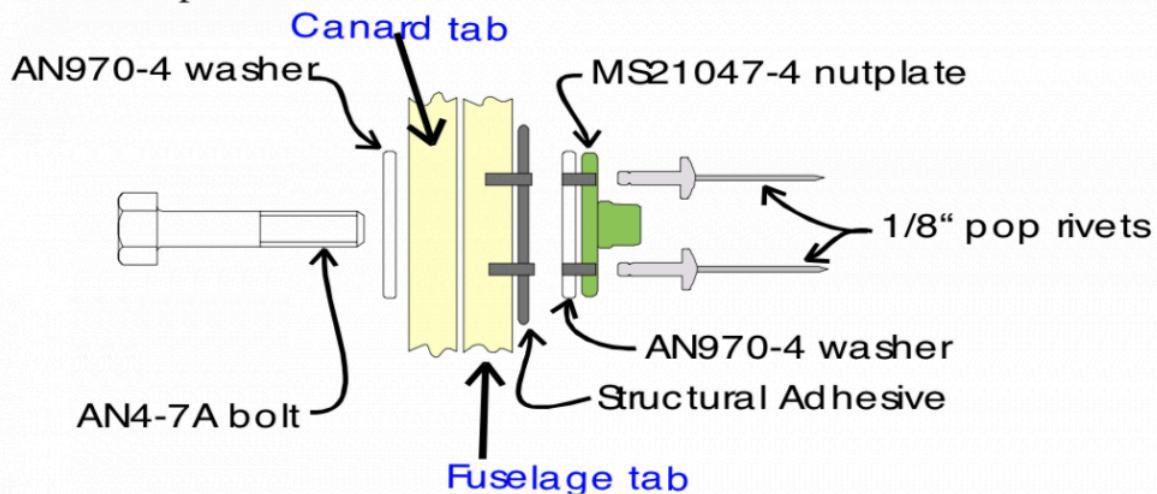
Aft Canard Attachment Cross-Section Detail
